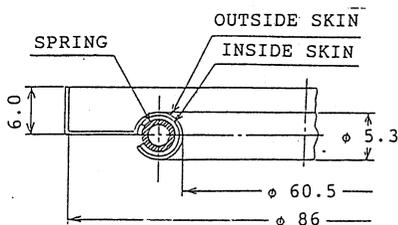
, The cross sectional view of a metal gasket (Helicoflex)
